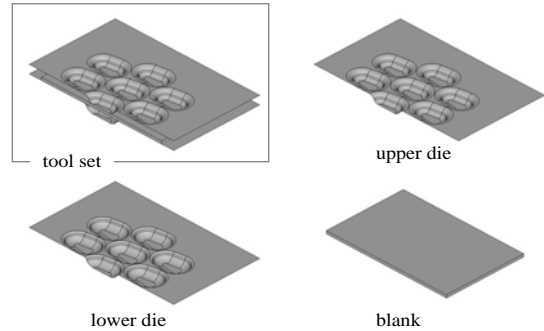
Tool sets of metal forming simulation for dimple type tube
